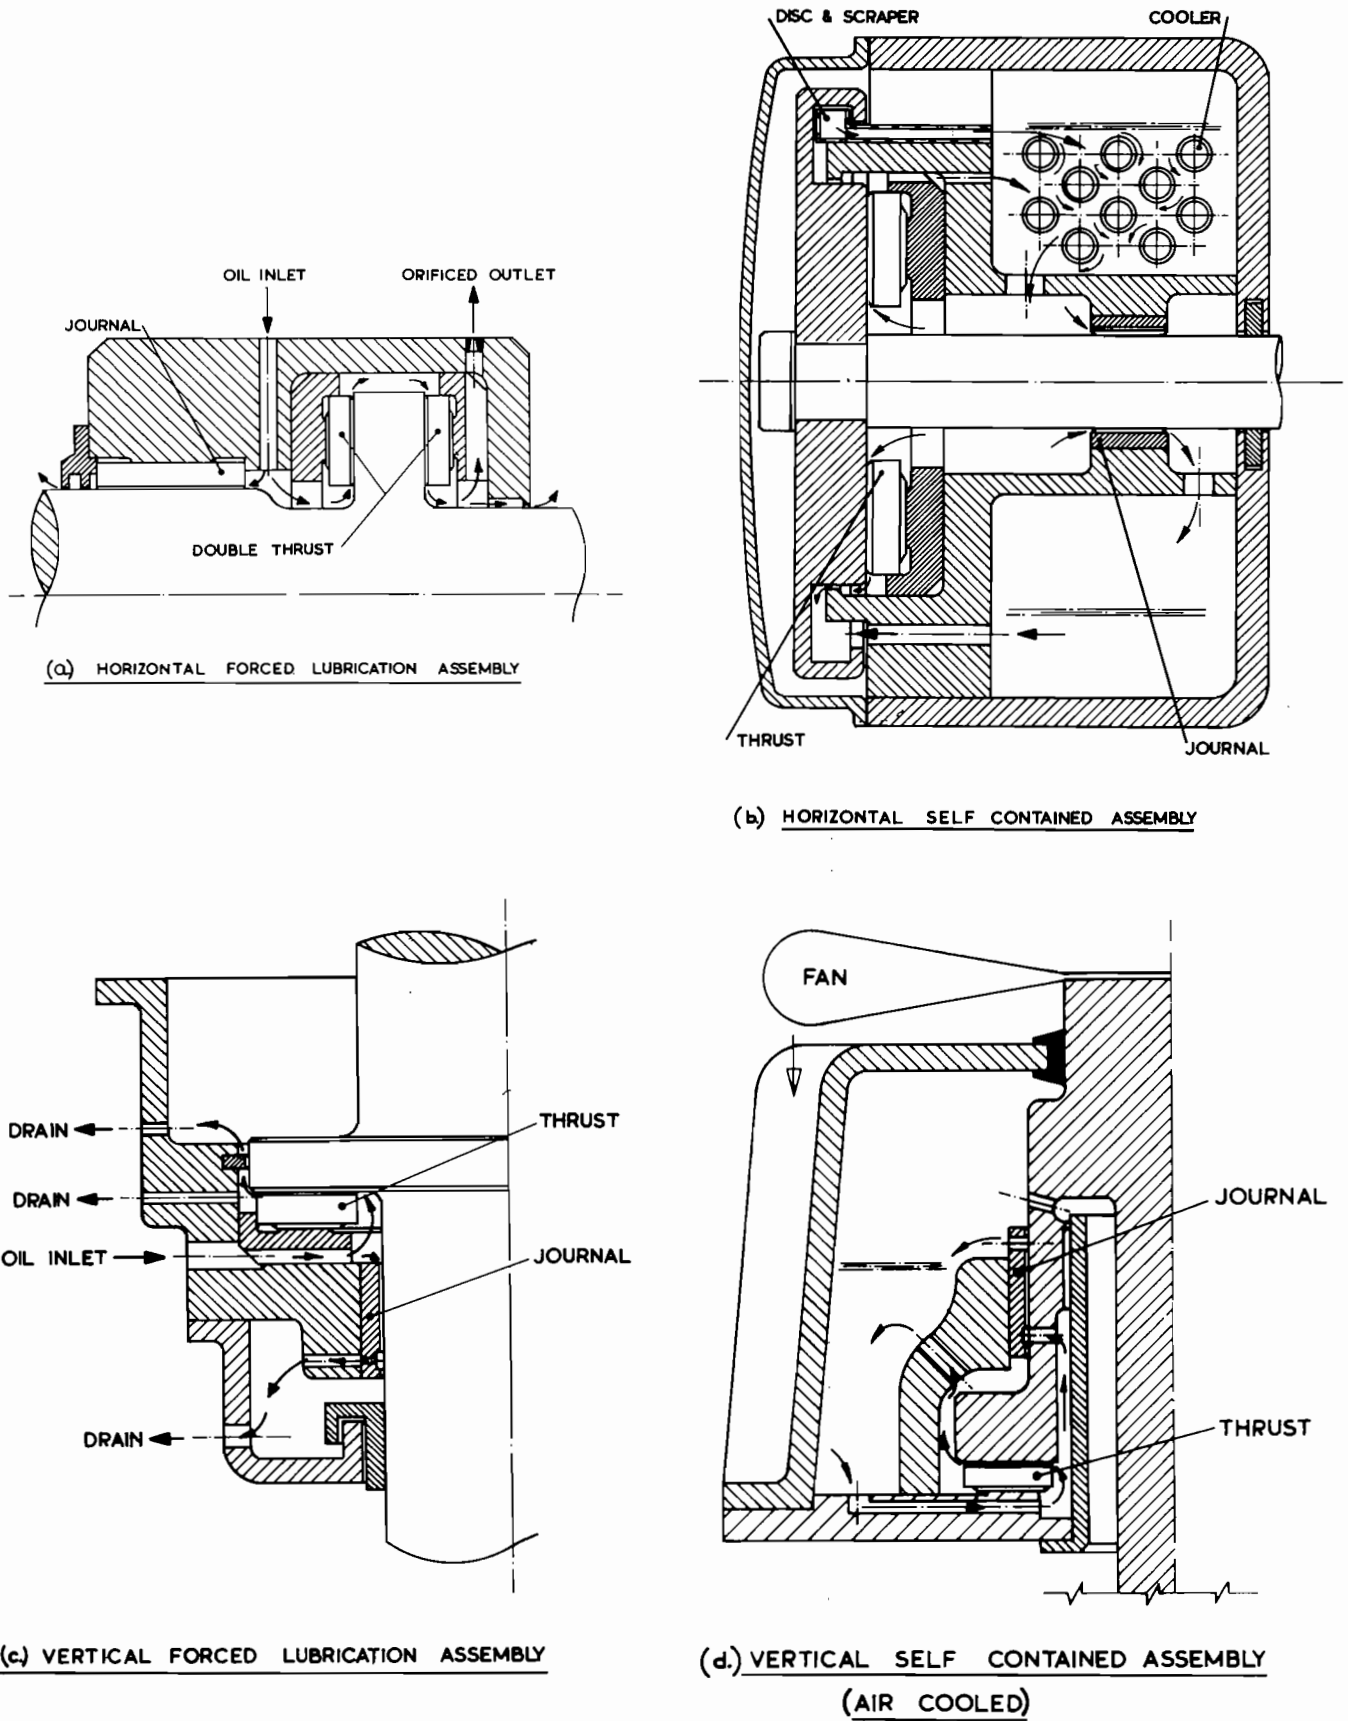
(a) (b) (c) (d). Typical Thrust & Journal Assemblies Showing Oil Circulation Paths.
